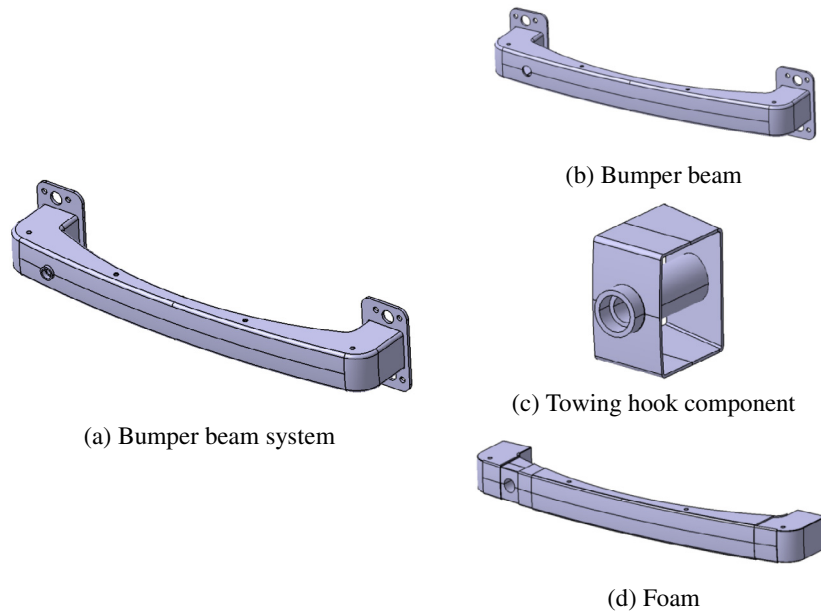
The integrated bumper system: (a) bumper beam system; (b) bumper beam; (c) towing hook component; (d) foam.
